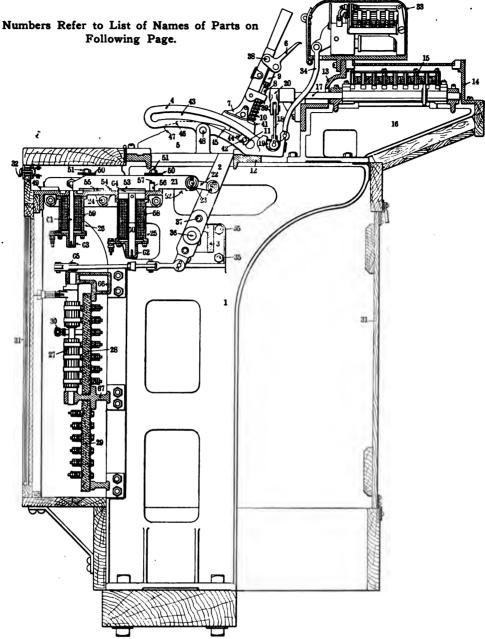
End Elevation and Part Section of Federal Electric Interlocking Machine.
